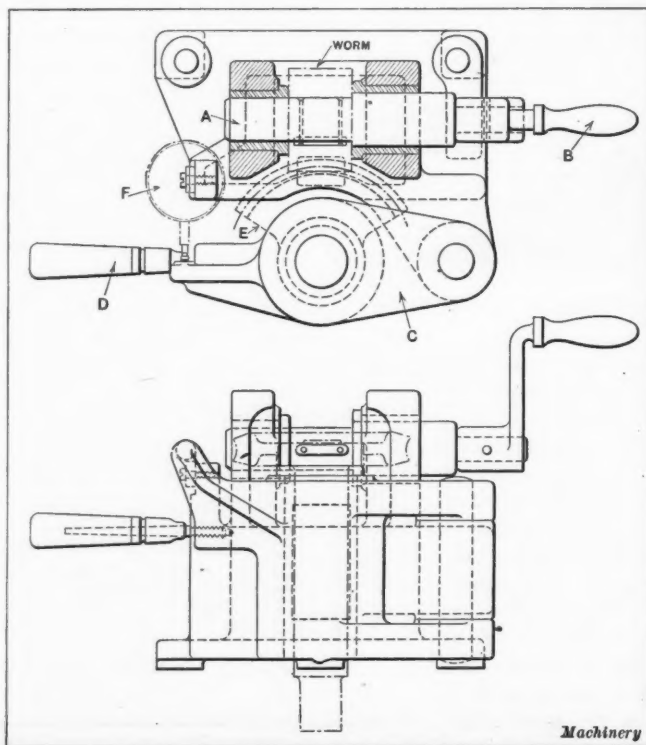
Fixture for testing Center Distance of Steering Gear Sector and Worm
